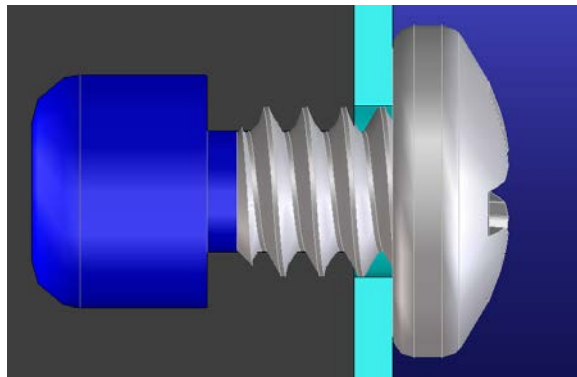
Option 2 – Side mount OEM hole, 6-32UNC X 1/8" (2.8 threads engagement)
